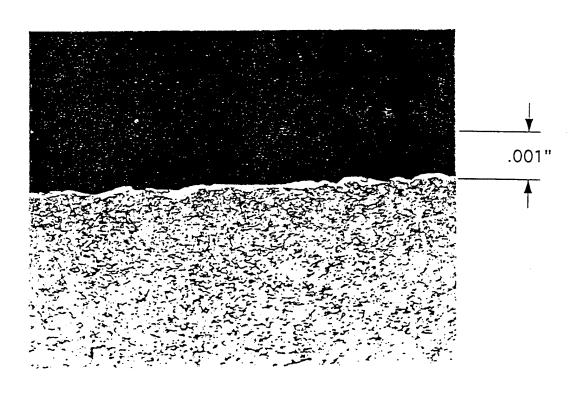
Wire EDM surface after glass-bead cleaning (magnification 500X)
